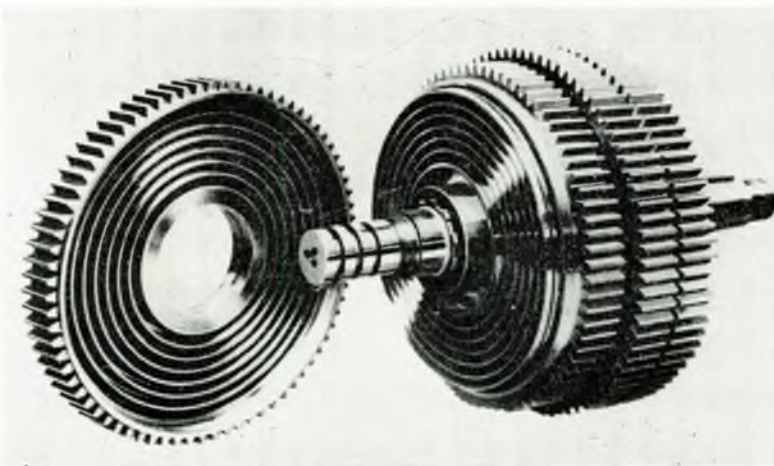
Close-up of the inner members of the clutch shown in Fig. 7
